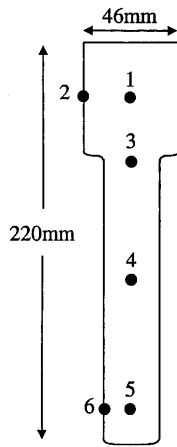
Sand mold used by Spittle et al.¹⁹⁾ with positions of thermocouples.
